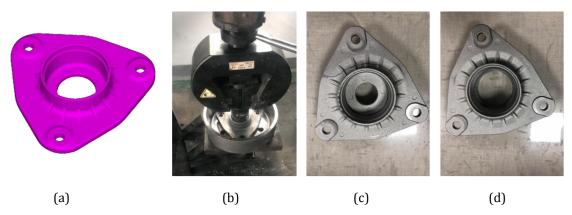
3D CAD model (a) top mount frame (b) performance testing process (c) & (d) Part crack and damage of the aluminum part after the performance test
